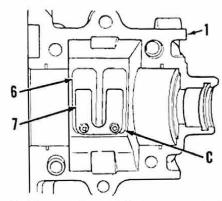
Reed petal (6) should be installed with beveled corner (C) toward drive end of crankcase
